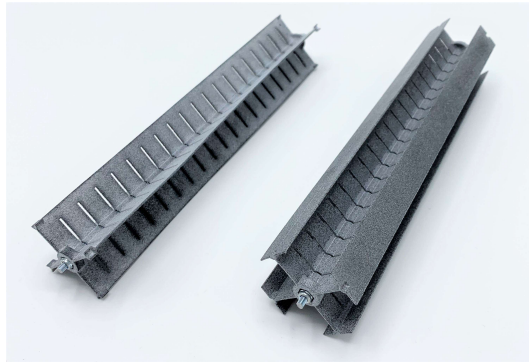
The prototypes were made from nylon (PA12) using multi-jet fusion 3D printing and prestressed using threaded rods.
